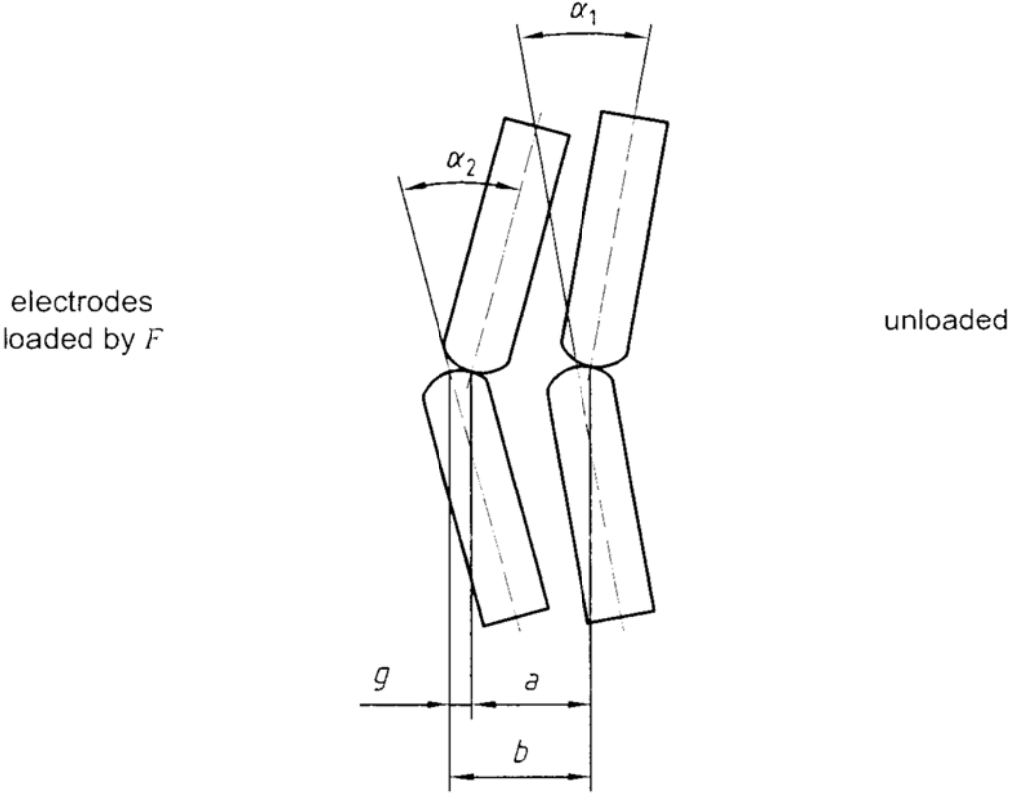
Contact fault in spot and seam welding equipment (ISO 669)
